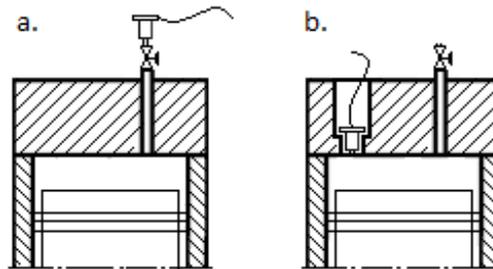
The sensors for measuring the pressure of the cylinder: a) on the indicator cock, b) in a special channel cylinder head
